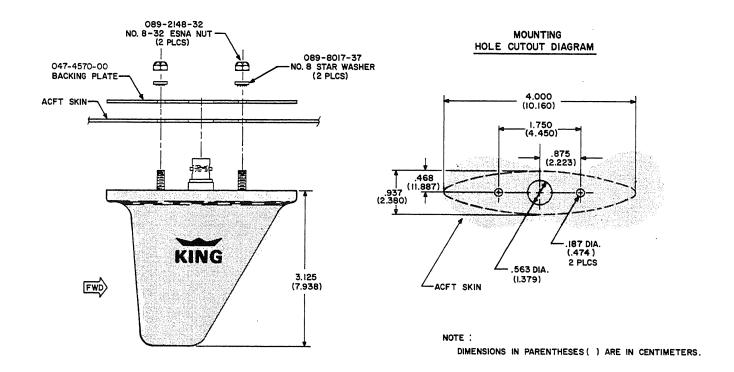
KNS 80 INSTALLATION DRAWING (Dwg. No. 155-5295-01, R-4) (Sheet 1 of 2)
